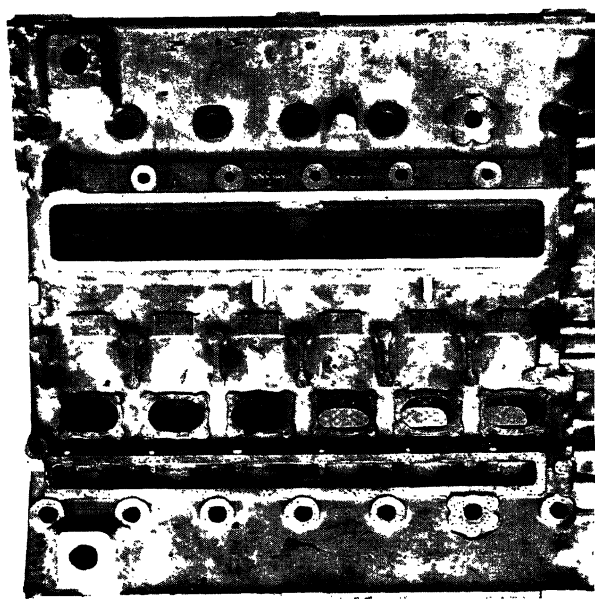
Aluminium alloy cylinder block and crankcase unit of Napier "Culverin" engine.
